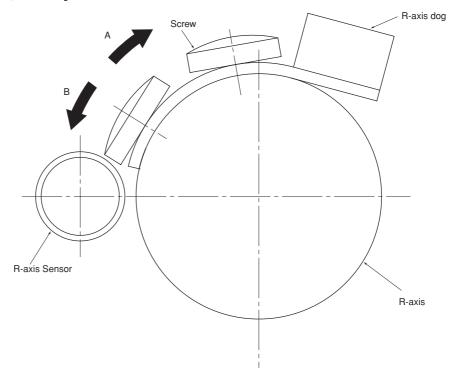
Adjustment of R-axis machine reference (View from below)
